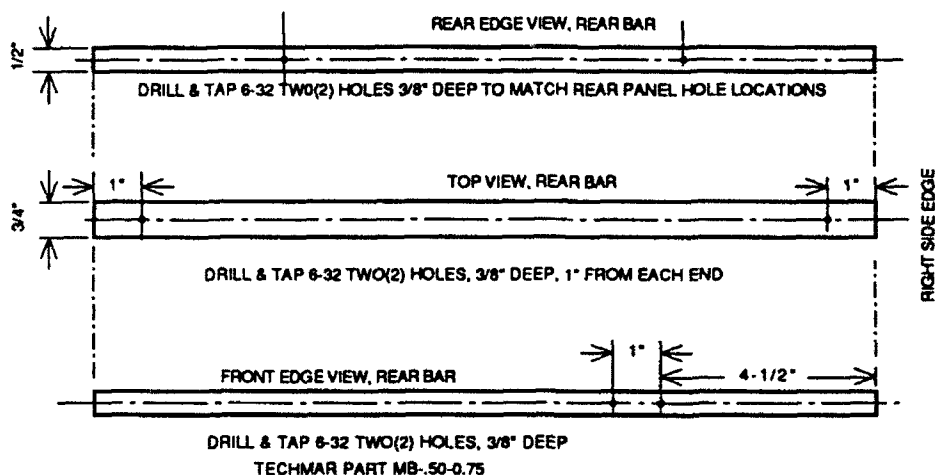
REAR CROSS MOUNTING BAR DRILL GUIDE
